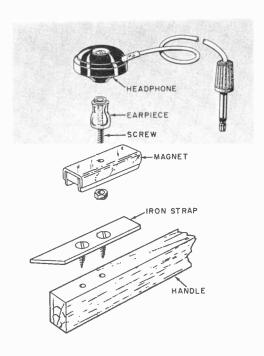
The pickup should be mounted on a small but strong magnet. The probe consists of a wood handle with a flat piece of iron bolted to one end.
